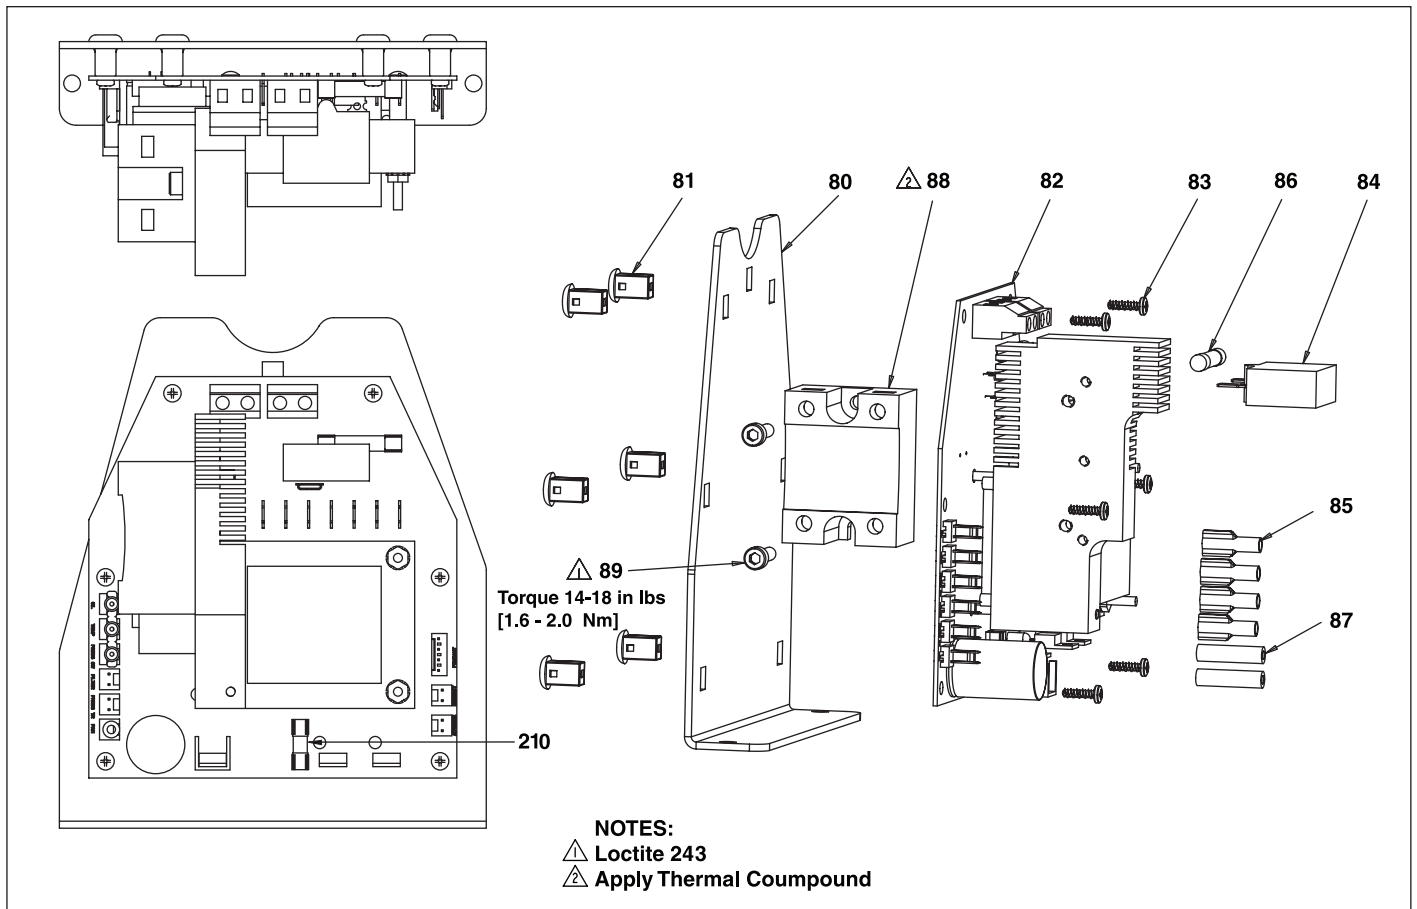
B, Middle Bracket Assembly, LCD Electric (Date Code "B")
